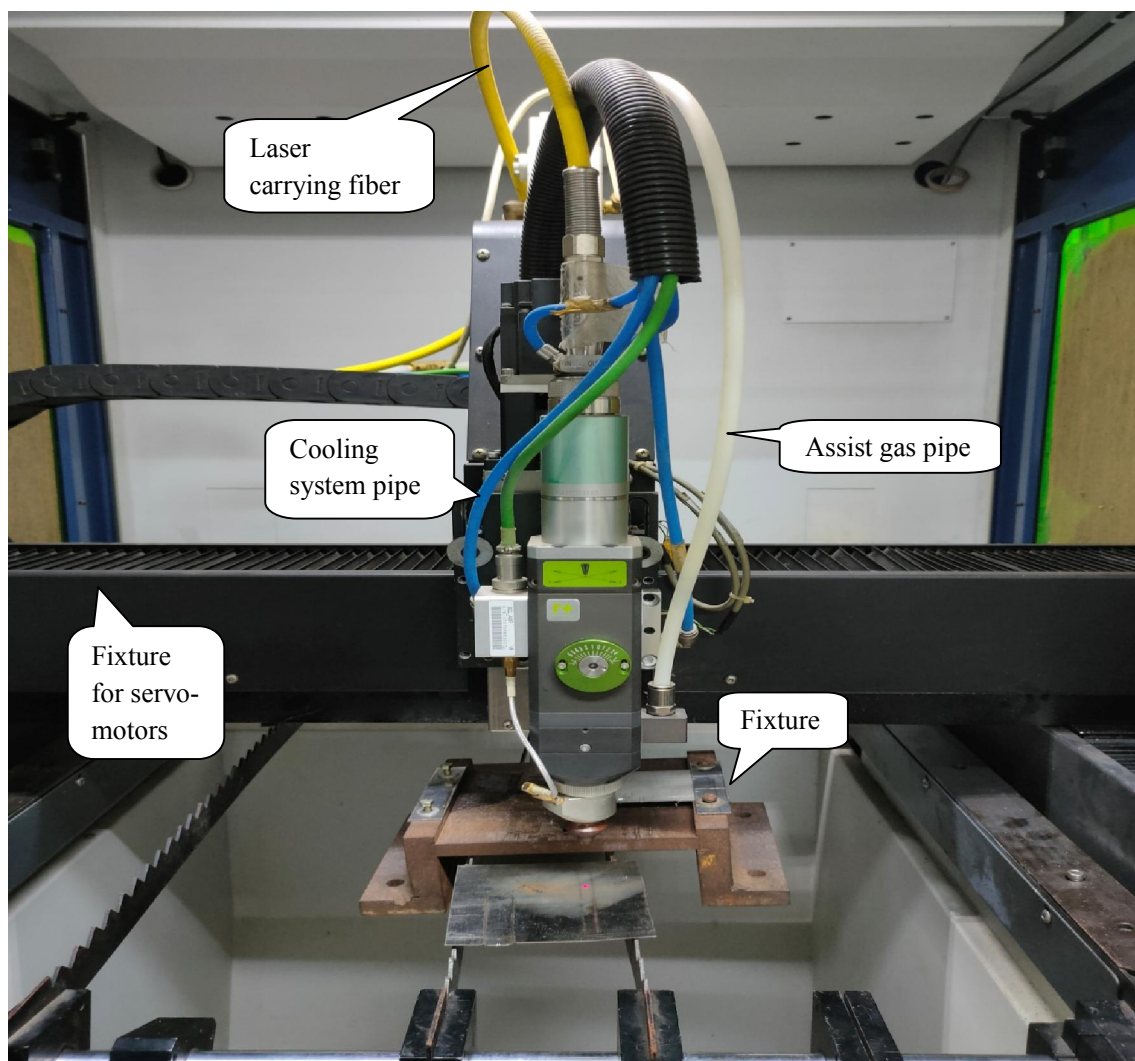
the laser system: comprising of the laser head, nozzle, fiber, assist gas pipe, fixture, workpiece and cooling system pipes
